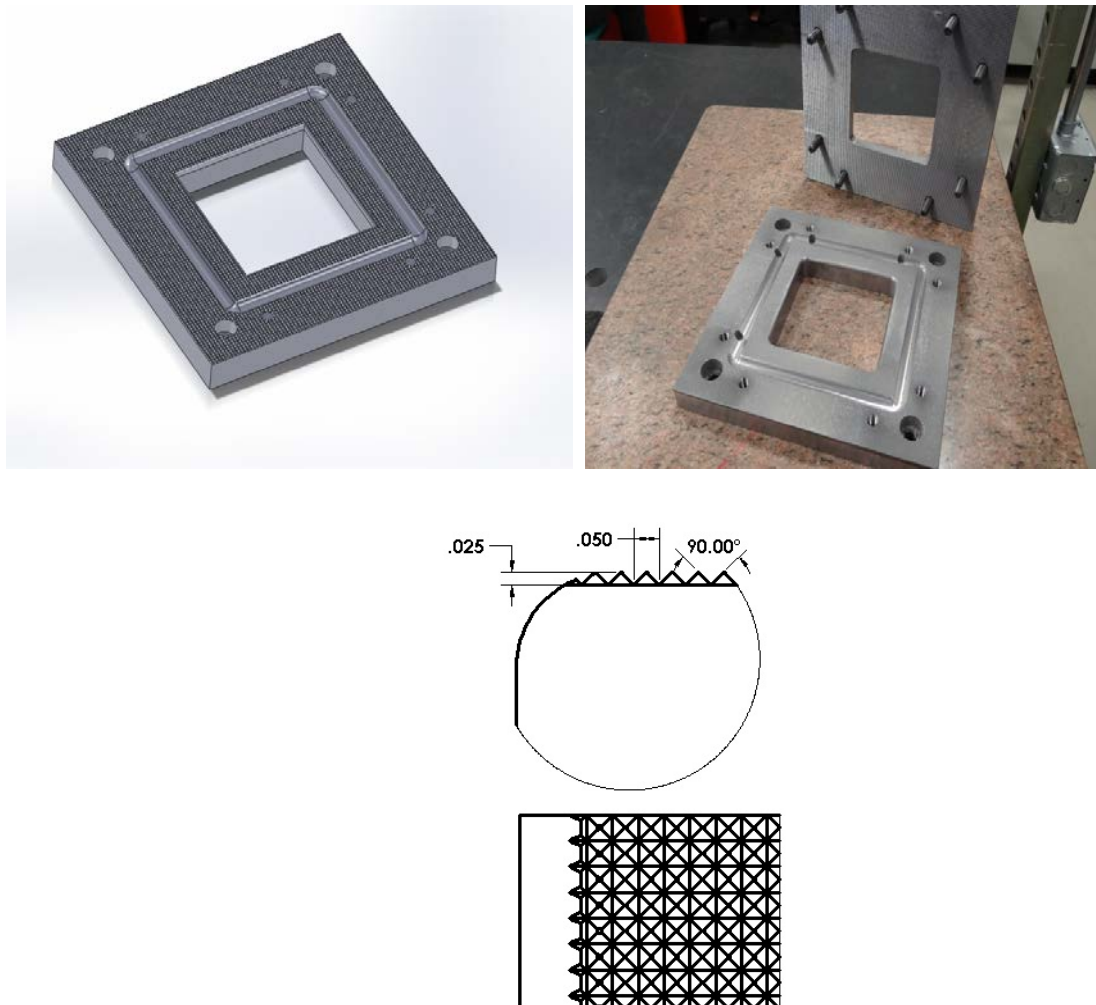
SolidWorks³ CAD view and photograph of diamond-serrated plate surface and CAD details
